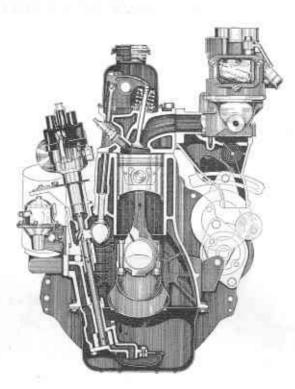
Front Sectional View of H-20 Engine $\frac{\pi}{2}$
